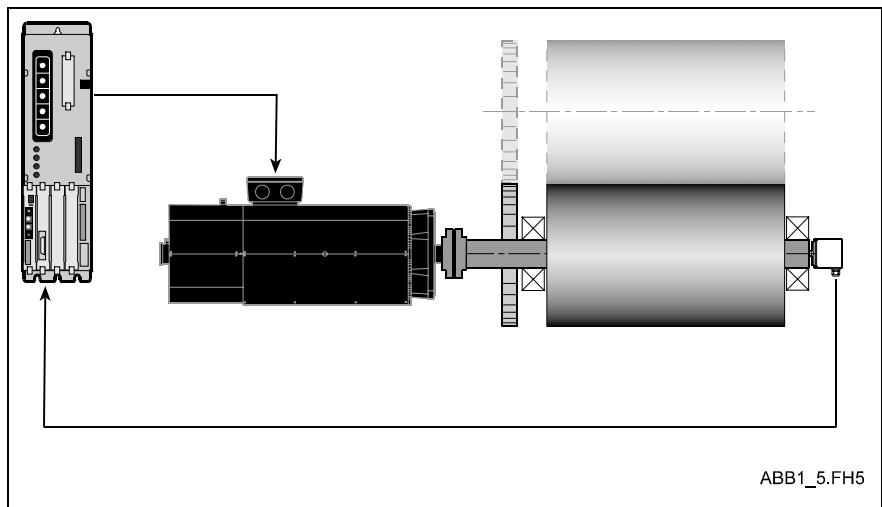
Axle drive without gear, with direct measuring system, e.g., press roller
